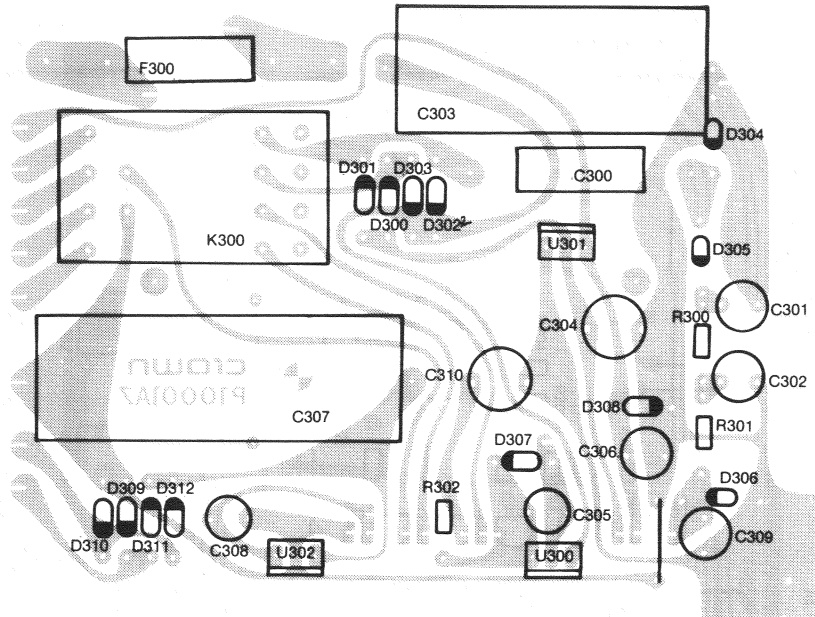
Power Supply Component Board Layout; #Q42468J0
